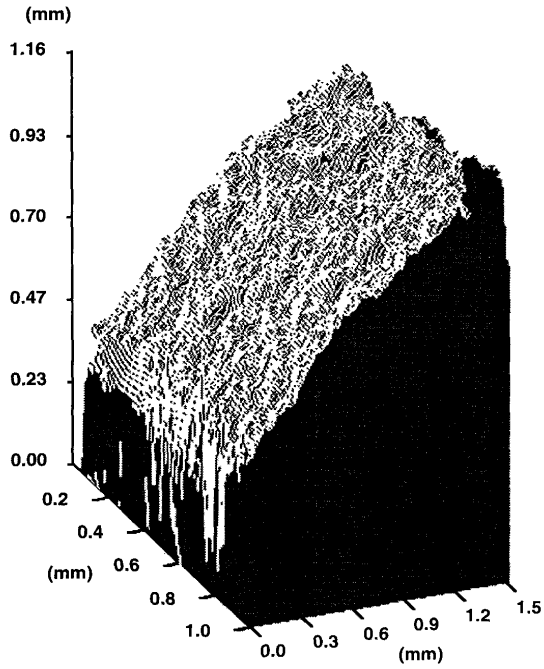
Scanned image of fracture surface of bolt.
